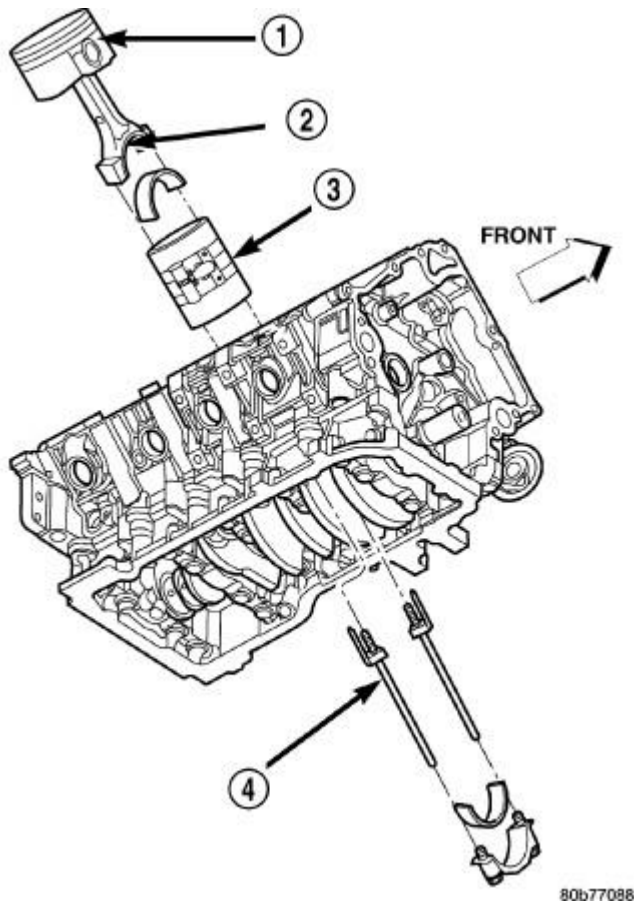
Piston, Oil Slinger Slot, Ring Compressor & Special Tool
